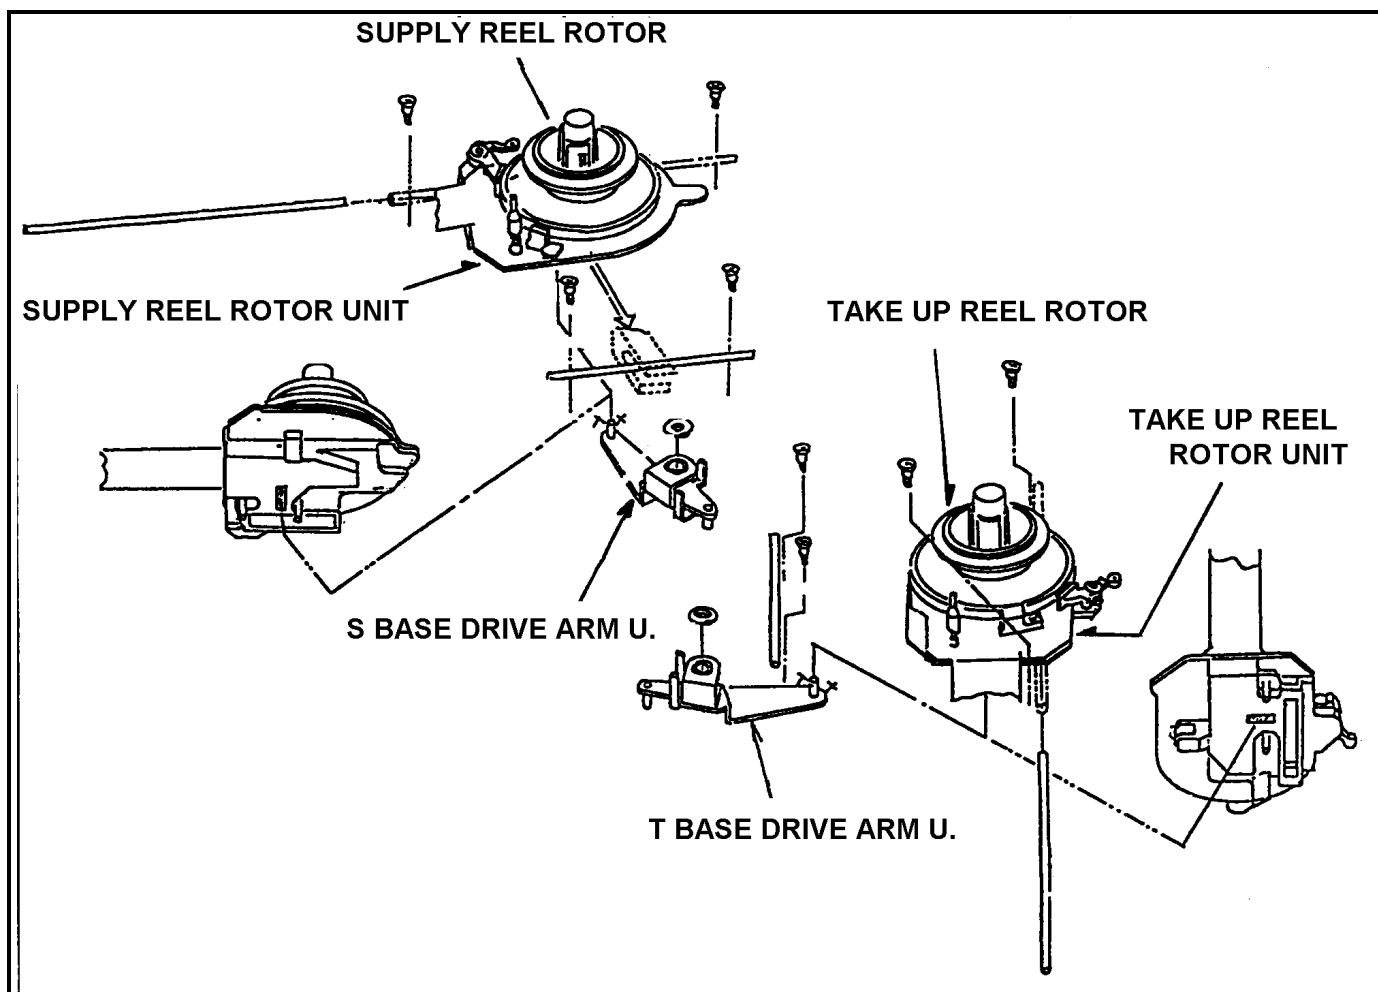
Installation of S & T Reel Rotor Unit
